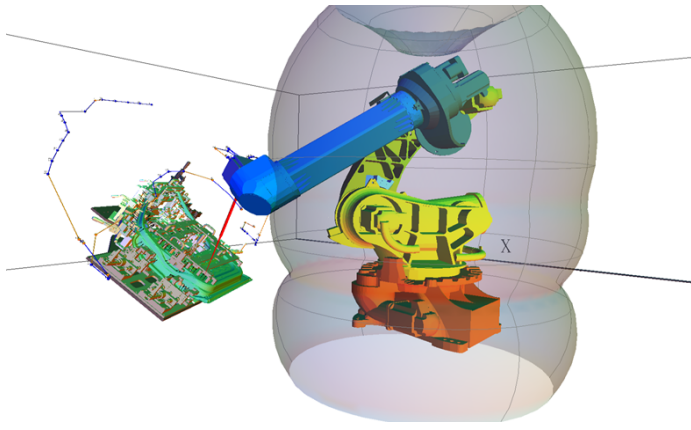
RLW robot welding a car front door, positioned in a fixture. The blue sections of the indicated scanner path represent the movement of the robot while welding, while yellow sections denote idle movement.
